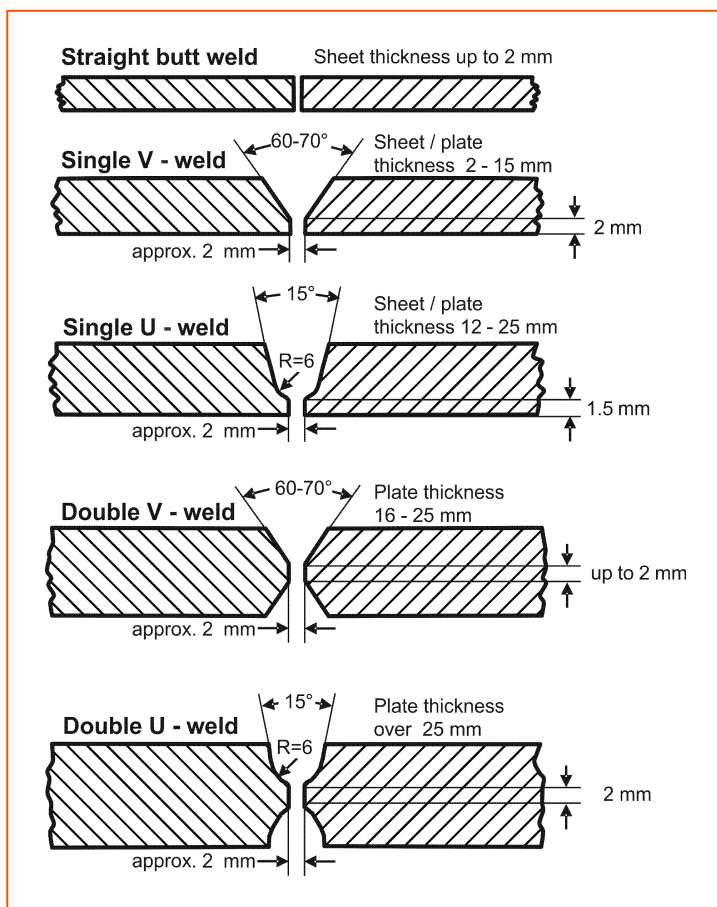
Edge preparations for welding nickel alloys and special stainless steels
